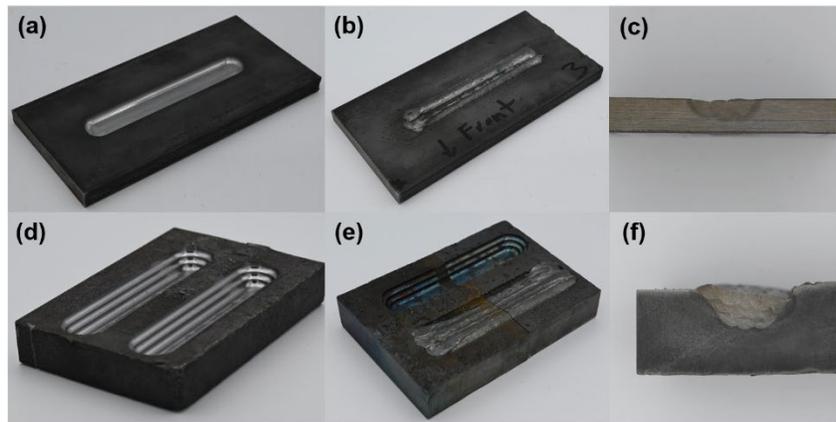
Production welding demonstration showing, a) single layer cavity, b) single layer weld, c) etched cross section of single layer weld, d) three layer cavity, e) three layer weld, f) etched cross section of three layer weld.
